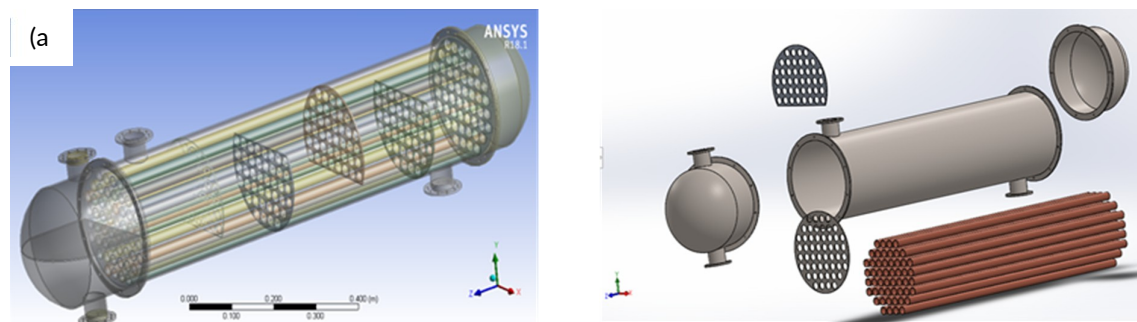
(a) transparent view of (HE), (b) assembly model of the (HE)
